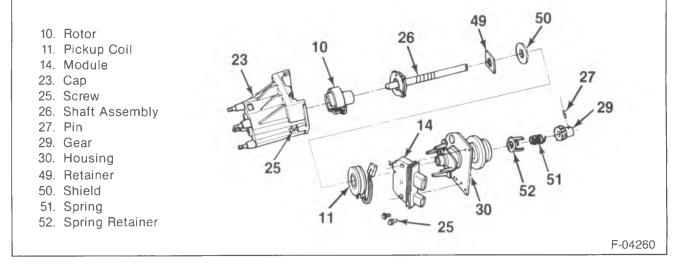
Distributor Components (Separate Coil and Sealed Connector)
